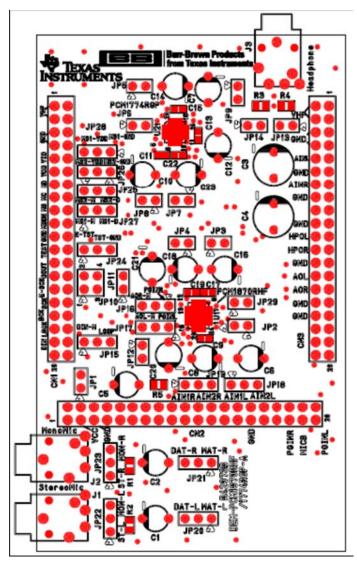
DEM-PCM1870RHF/1774RGP-A Board Layout—Silkscreen Side
